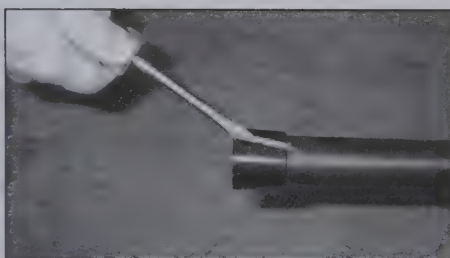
Using a screwdriver as a wedge, pop apart the plastic cap base.
